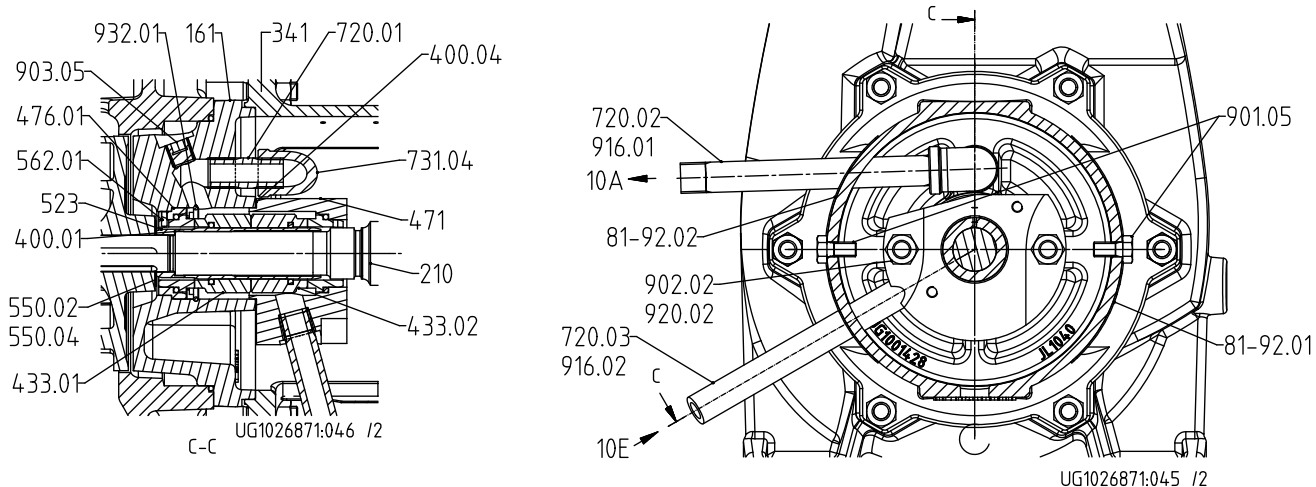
Mechanical seals in back-to-back arrangement, shaft units 25/35
